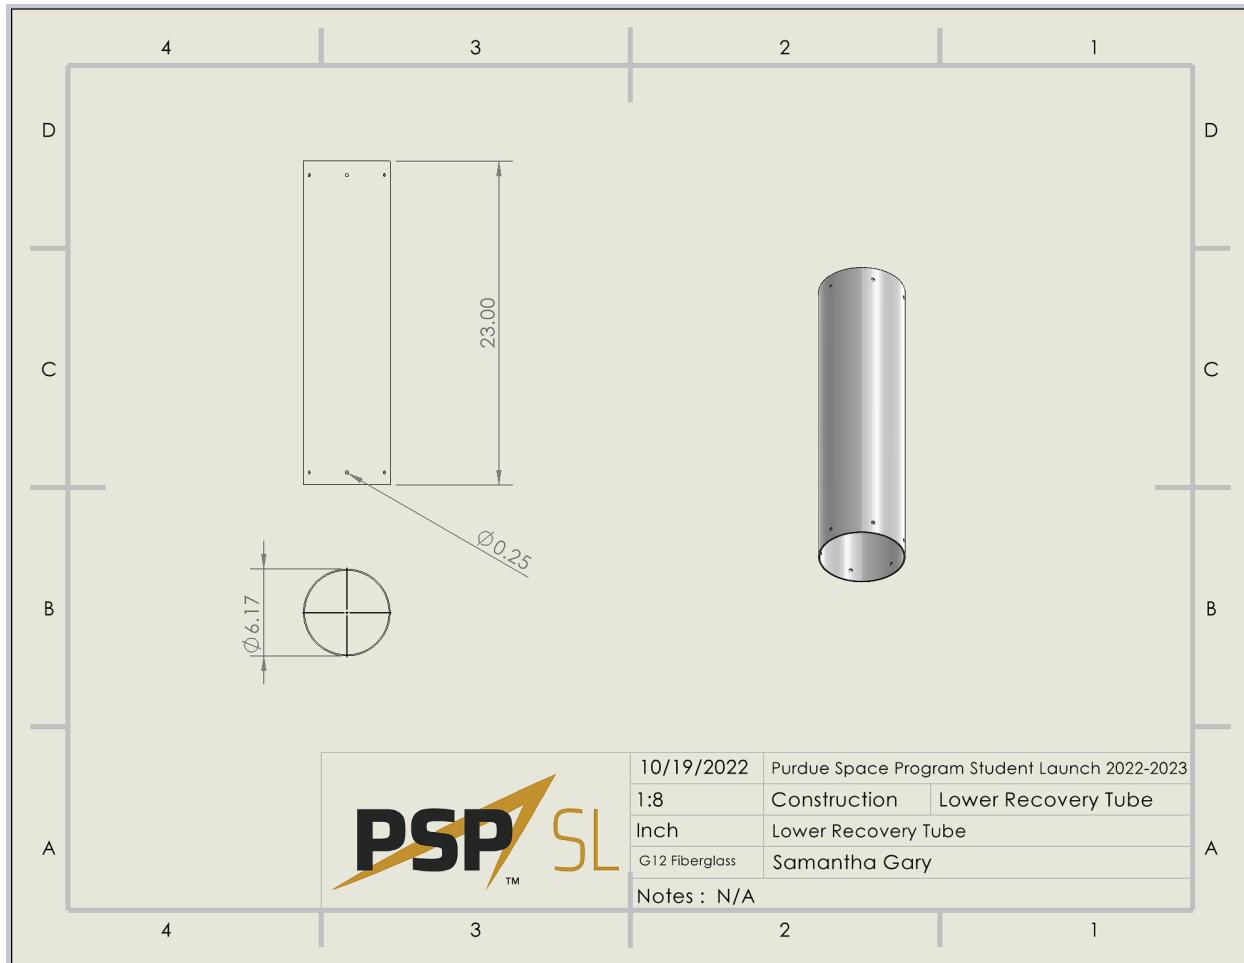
Technical Drawing for Lower Recovery Tube
